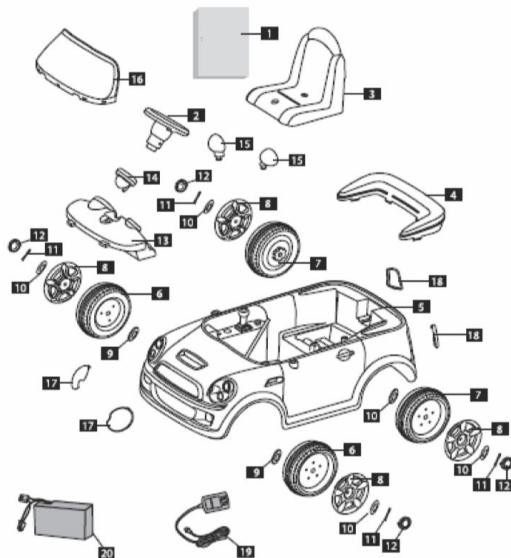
Disassembled view of the components of the Mini-Cooper S ride on toy. A majority of the components consist of polypropylene polymers.
